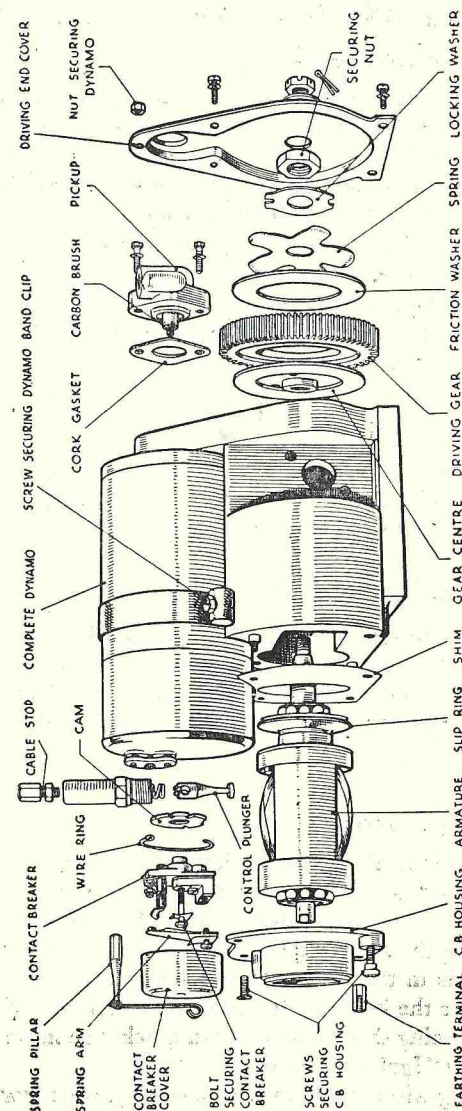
EXPLODED VIEW OF MAGDYNO (TYPE MOI).
